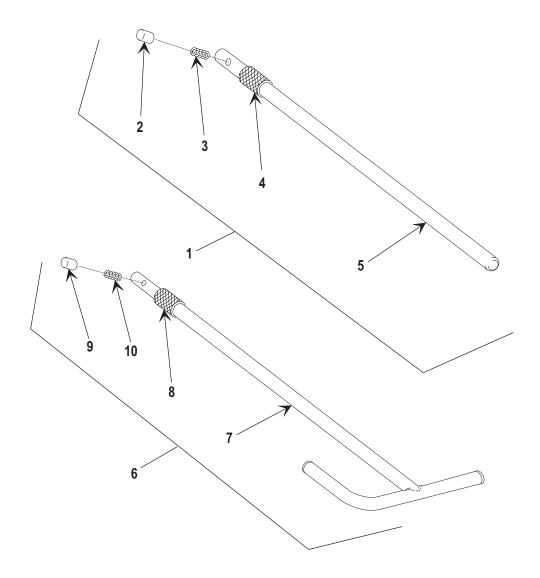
Artillery Cleaning Staff Assembly 12576922, Staff Section, Cleaning 12577325, Handle, Manual Control 12577326, and Staff Section, Cleaning 12577324 (Sheet 1 of 2).
